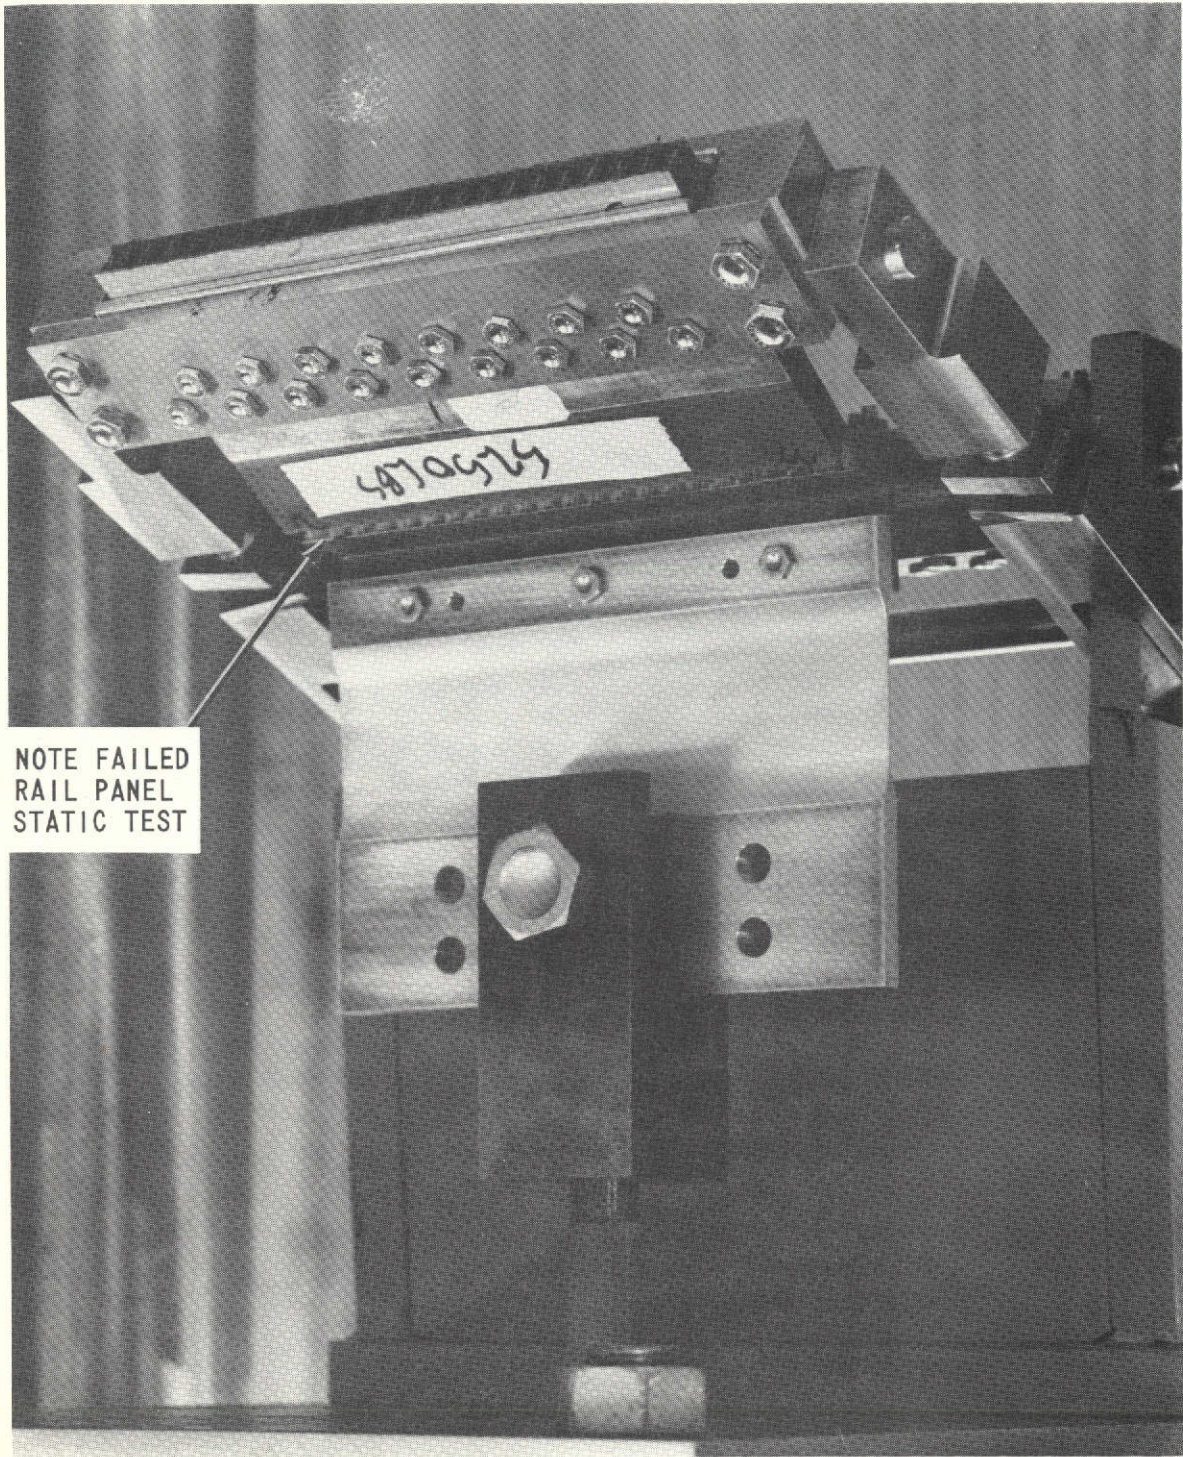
TYPICAL RAIL PANEL IN TEST FIXTURE
